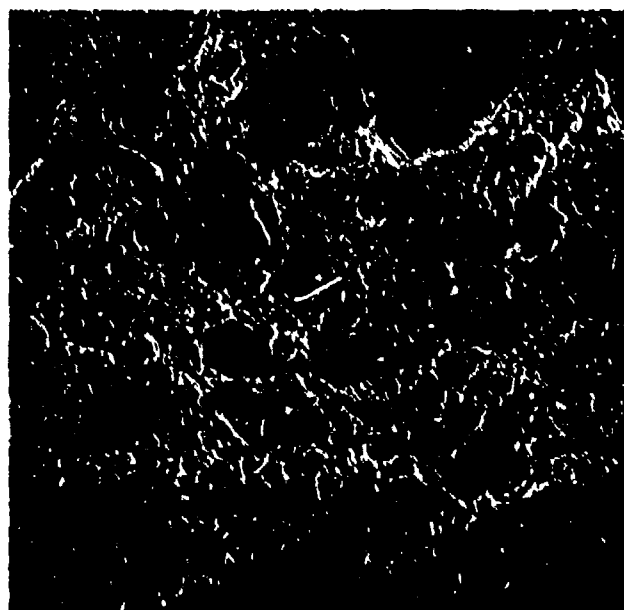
Tensile failure of a temper-embrittled A-514 weld specimen by dimple rupture, 750x.
